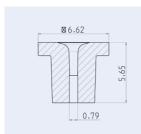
Schematic drawing of male Luer tube tuck connector Fluidic 1580
